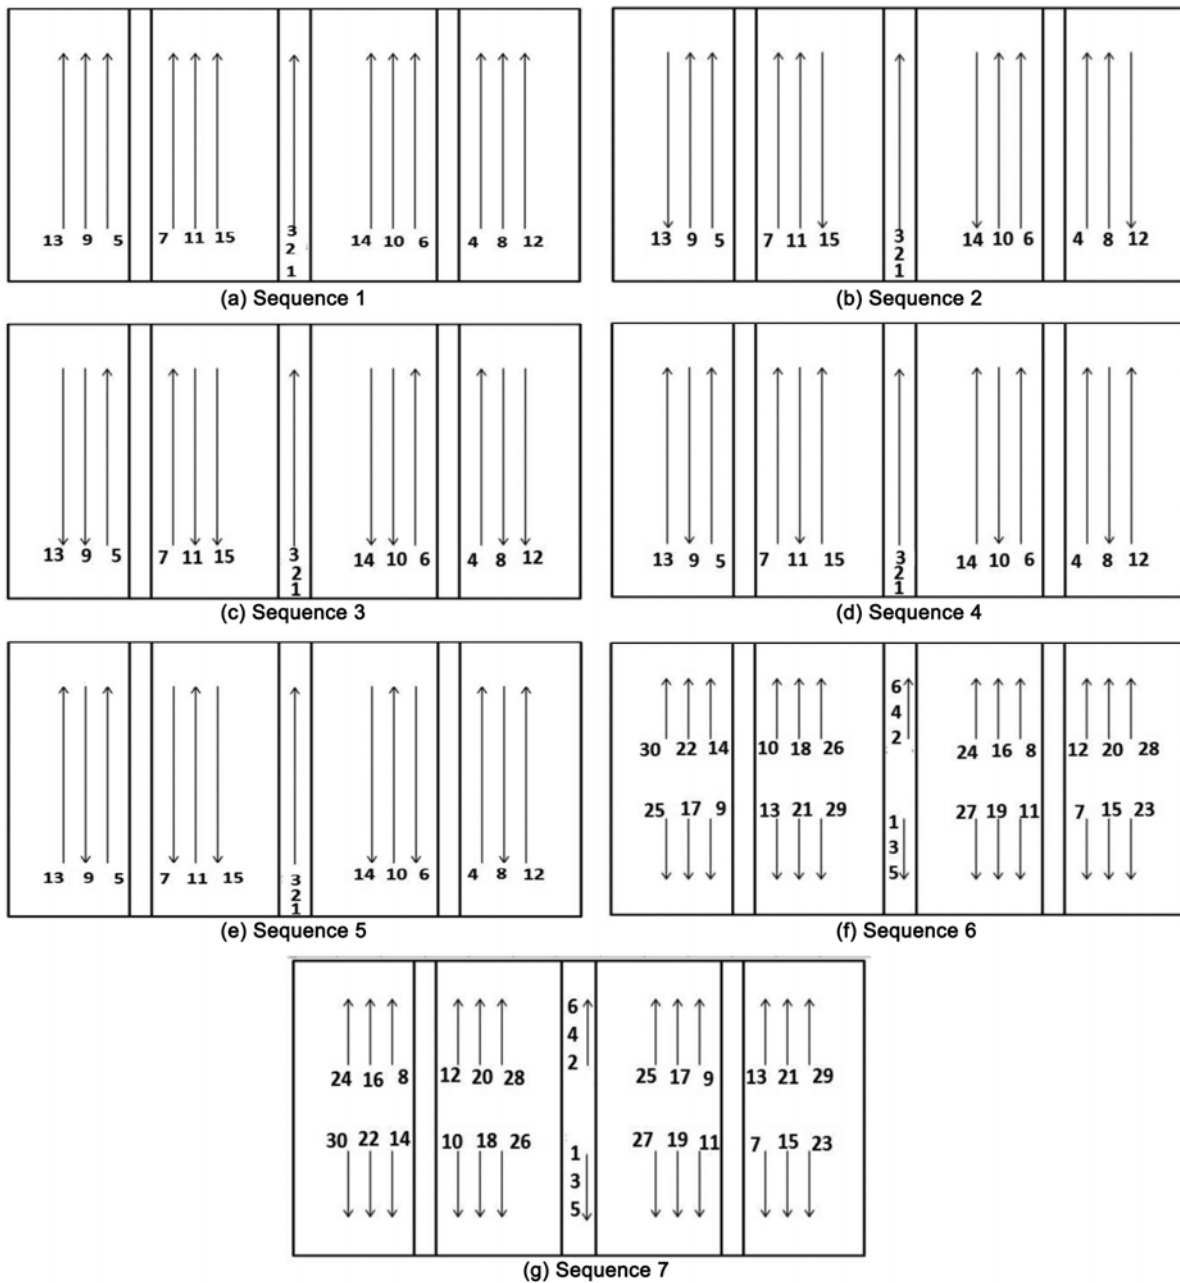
Investigated weld sequences for distortion analysis on combined butt and fillet weld joint
